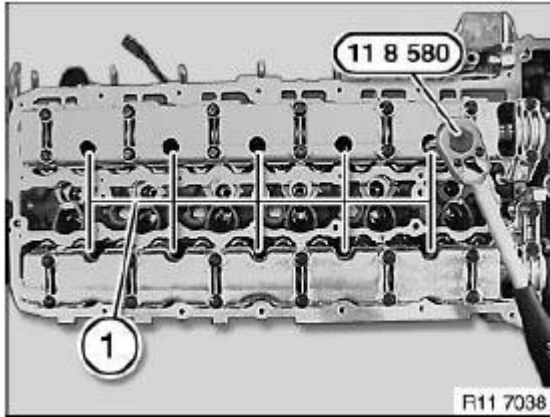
Removing M10 Cylinder Head Bolts Using Special Tool 11 8 580
